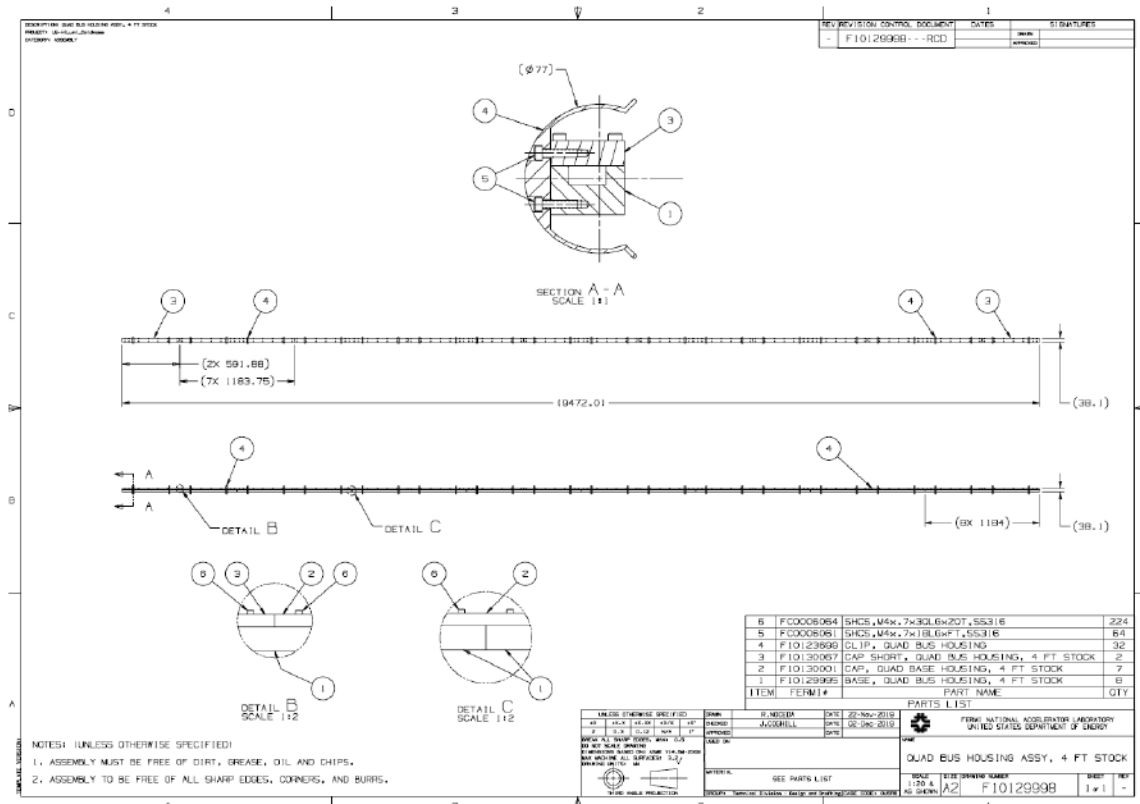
Completed Engineering Drawing of the MQXF Bus Housing Assembly.
